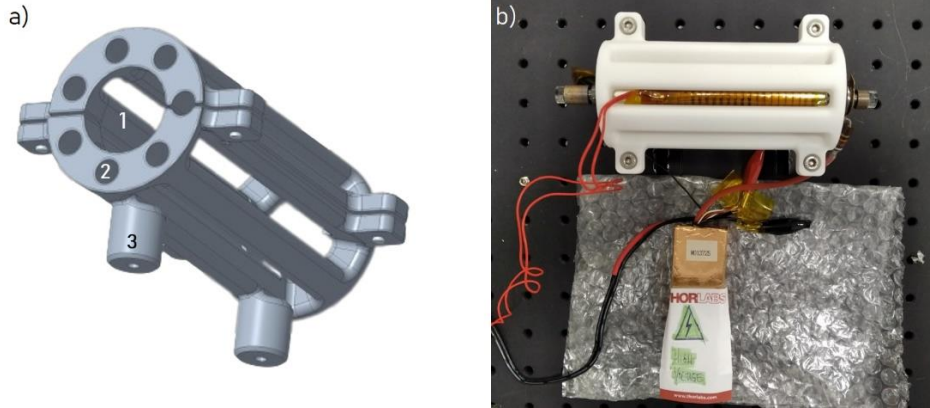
a): Sketch of the custom laser holder with the big central hole to seat the HeNe tube (1), the side holes hosting the magnetic rods (2) and the screw hole to fix the holder to the optical table. b): a picture of the actual laser inside the custom holder
